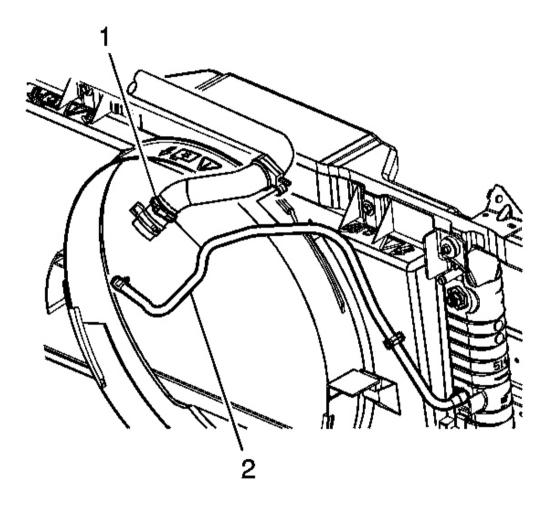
Radiator Vent Inlet Hose Courtesy of GENERAL MOTORS CORP.
